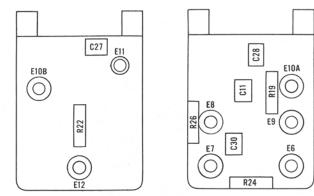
Printed circuit board 1A11A2, parts location diagram.
